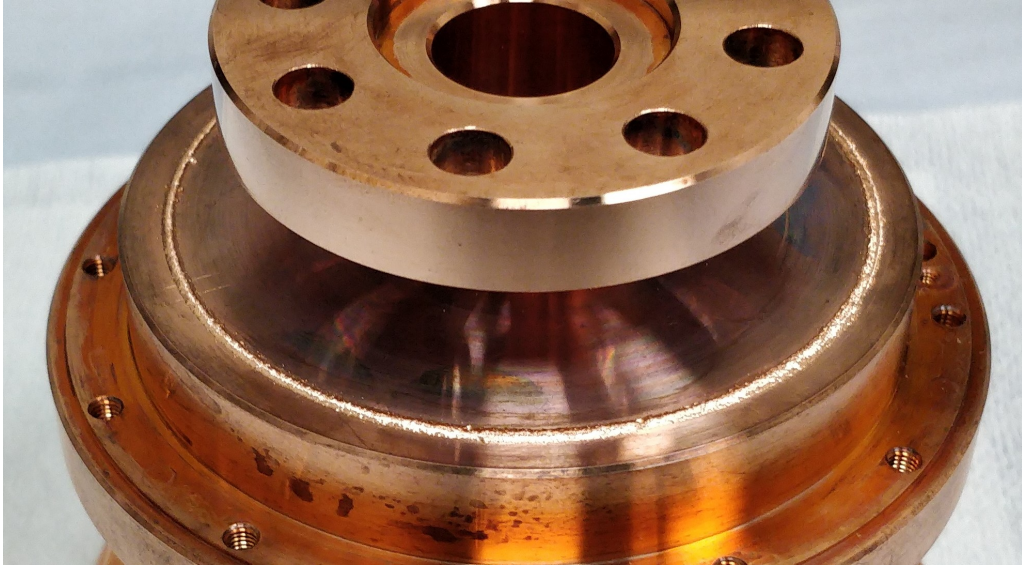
Result of electron-beam welding the upper endcap to the cavity body.
